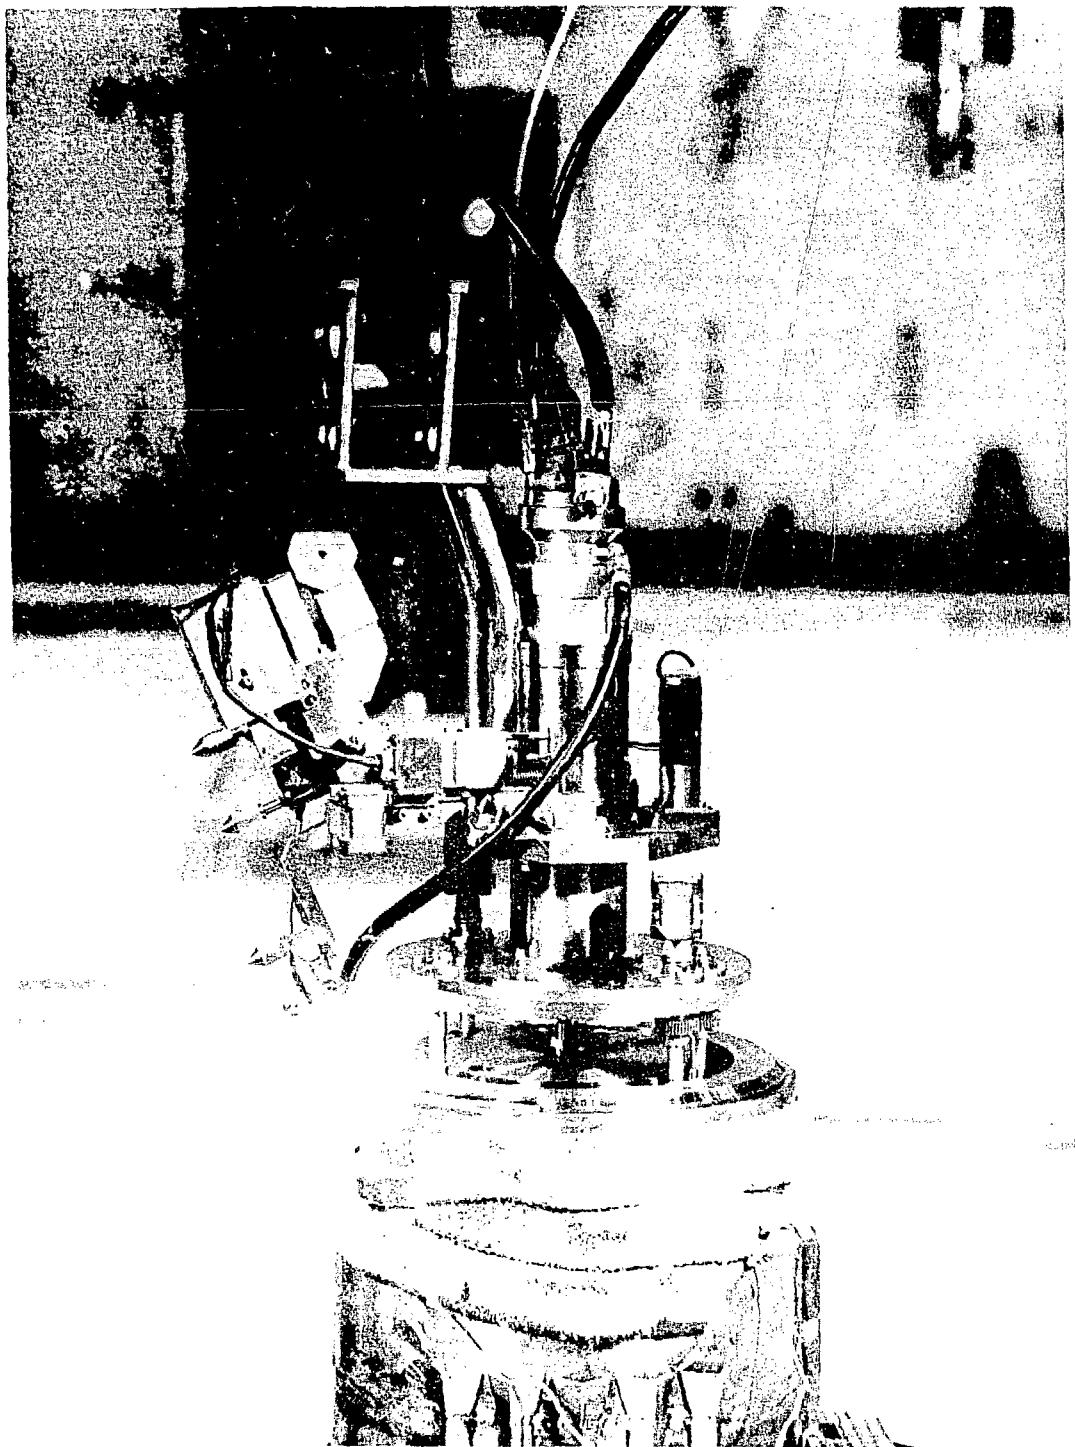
Canister Closure Lid Being Seal Welded
